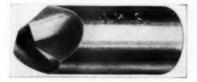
Fig. C. This is another commonly-used Shaped Diamond Boring Tool. The main difference from B is that the point, or more correctly the radius, is offset a bit to the right of the center line. The included angle in this case of 85 degrees and the radius .015 in. Experience has shown this type well suited for finished boring of wrist pin holes in automobile pistons.
